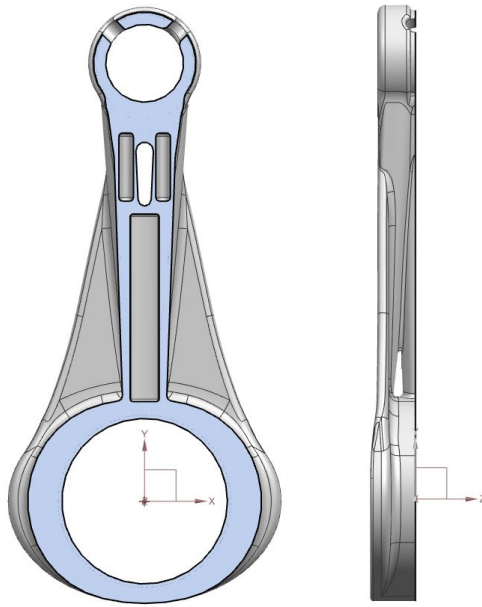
Cross-sections of 2.0 beam about Z-axis; Center cut.
